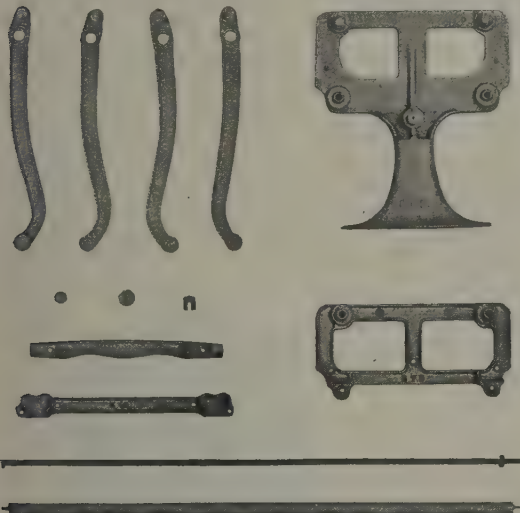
Metal Parts of Scarritt Low Back Coach Seat No. 16. Scarritt Car Seat & Manufacturing Company.
